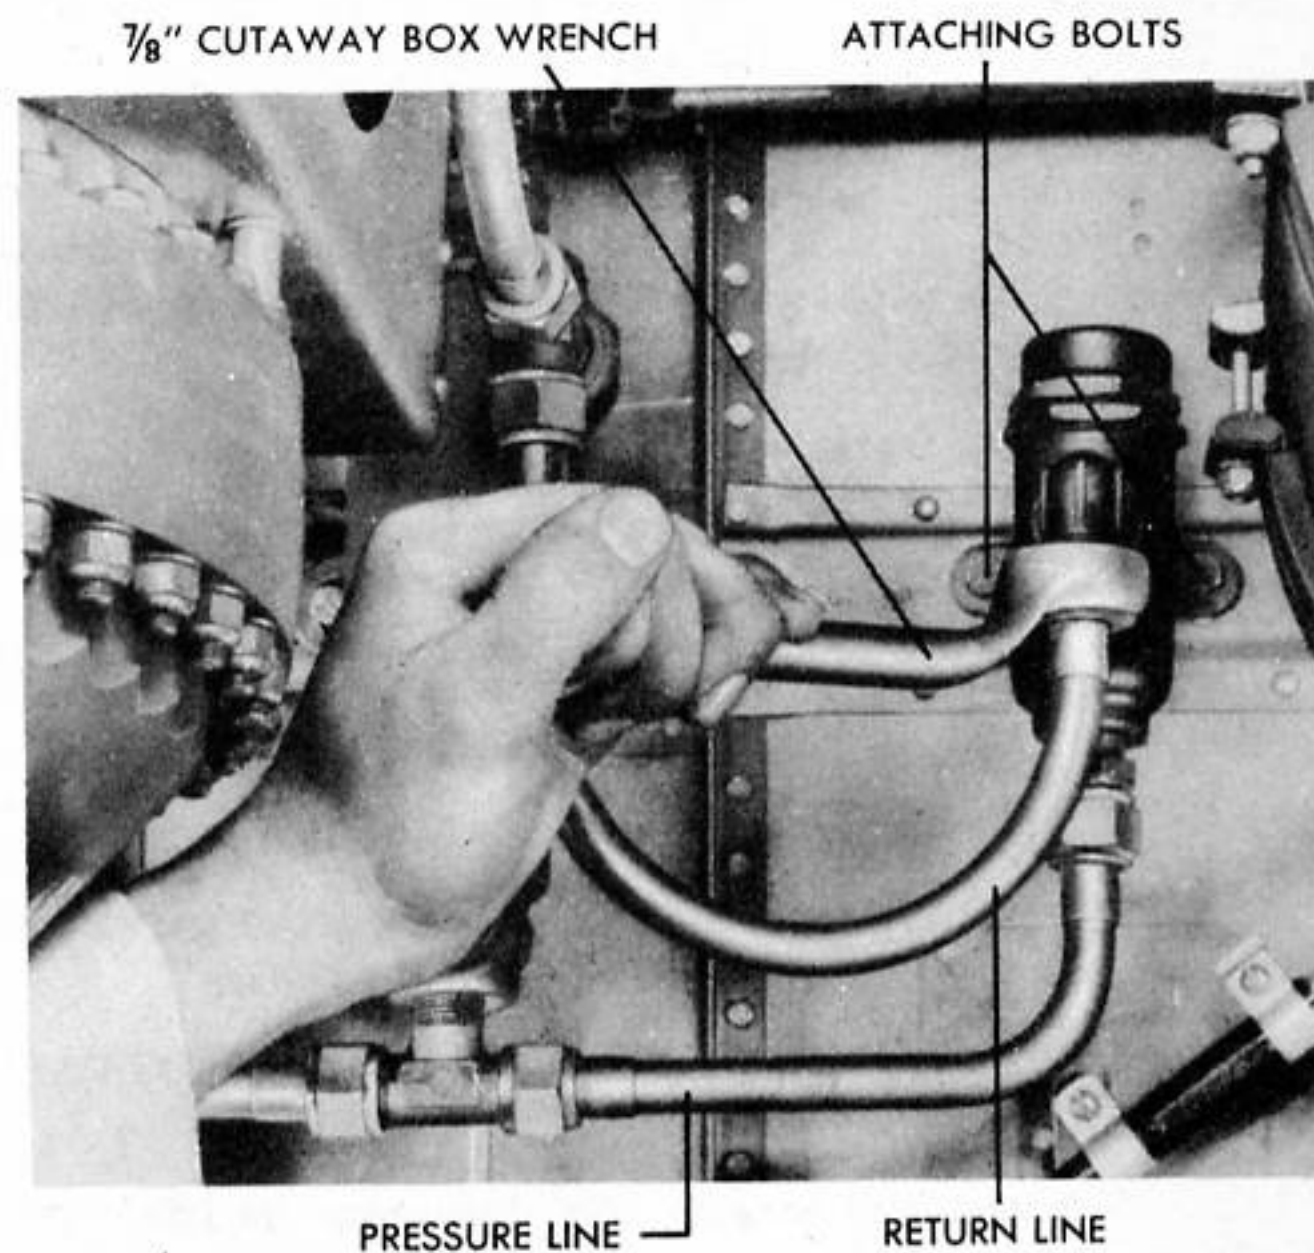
REMOVING PRESSURE REGULATOR RELIEF VALVE
